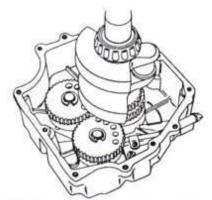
View showing Dyna-Static balancer gears installed in Model HH80, HH100 or HH120 crankcase cover. Note gear retaining snap rings.
